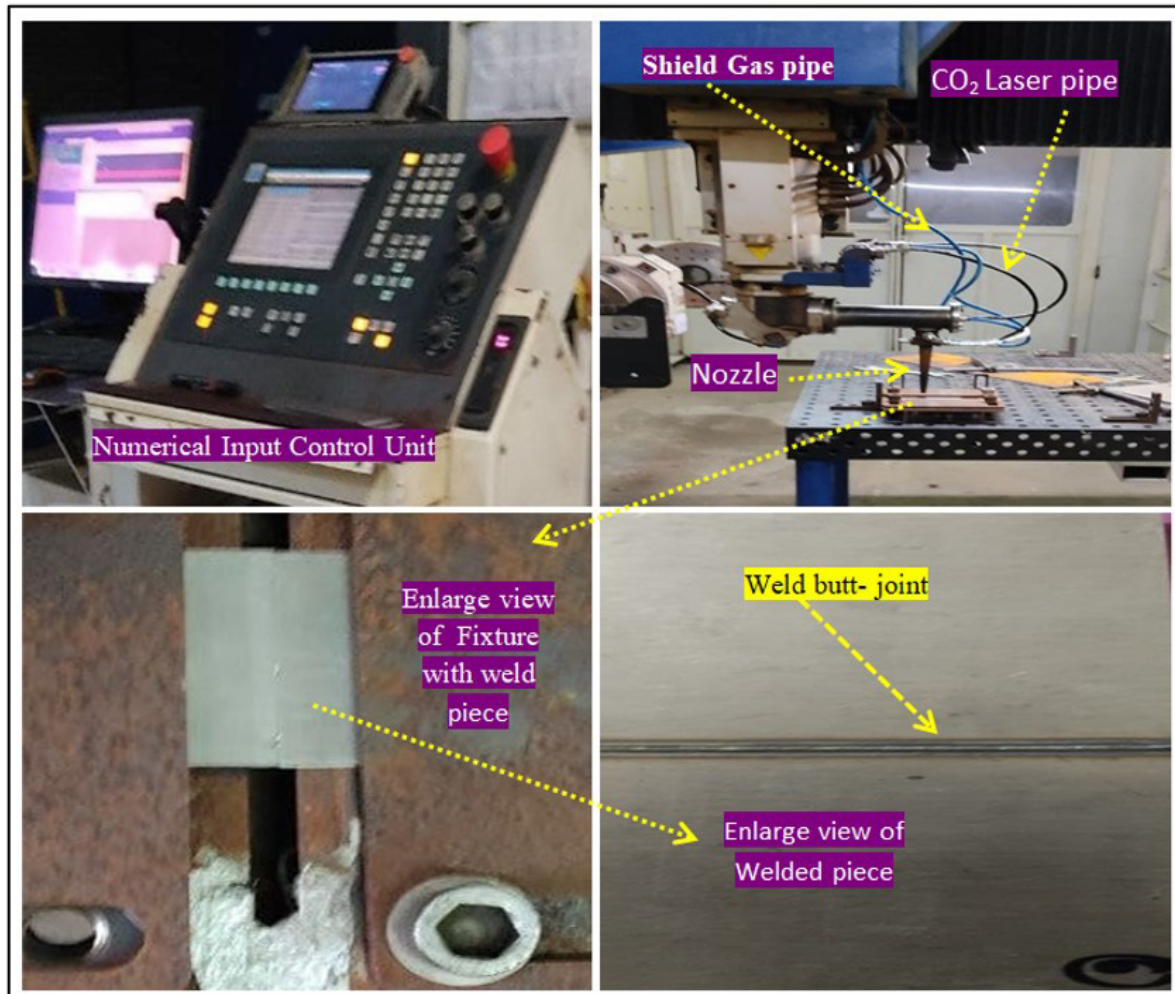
Experimental setup of CO_2 laser welding.
